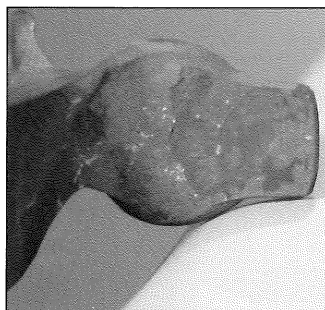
Clean up the sides of the scarf now, prior to welding
